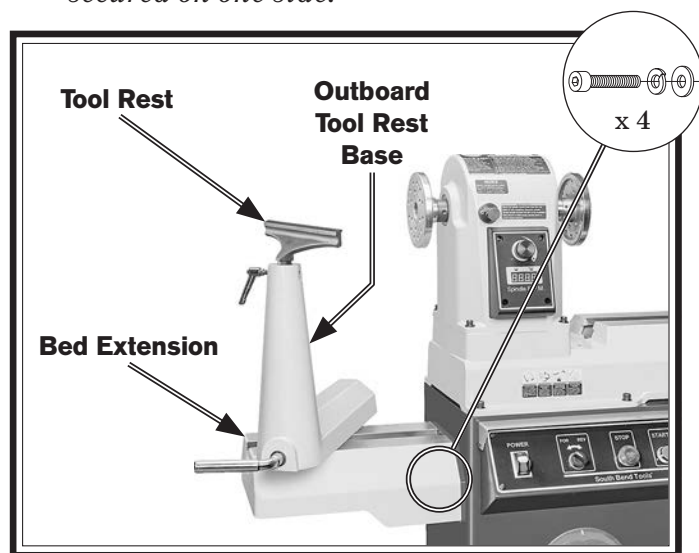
Outboard bed extension installed with optional SB1129 tool rest base.
